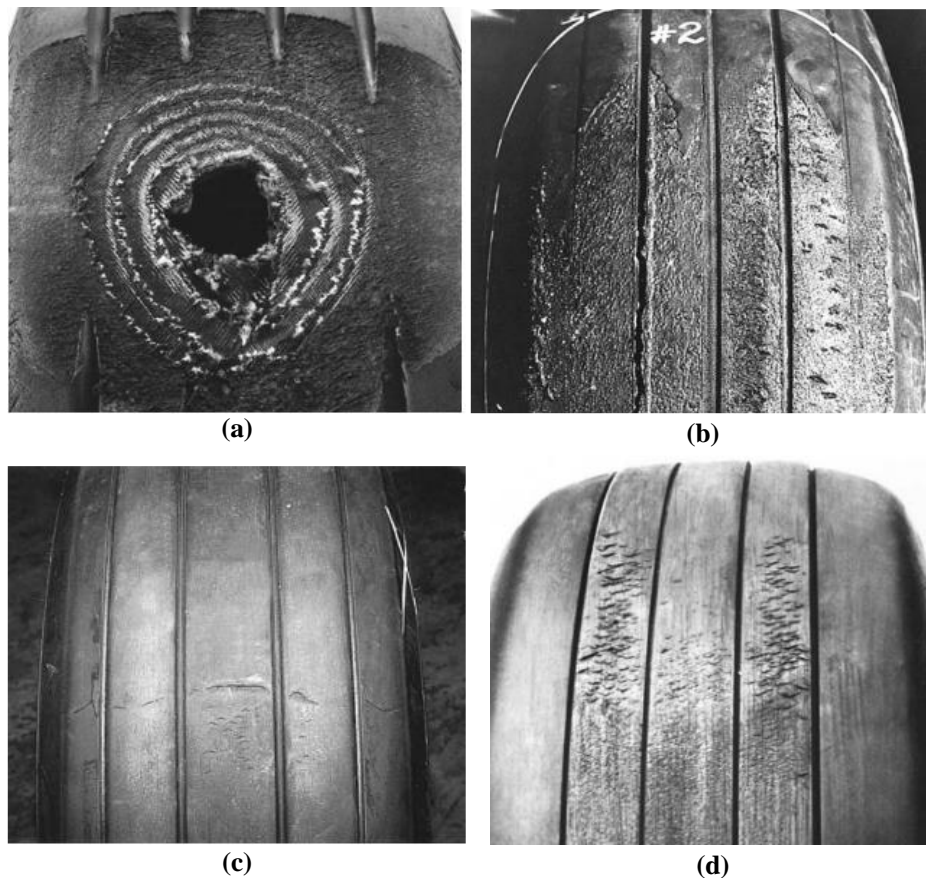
Tyre tread wear patterns: (a) Skid, (b) Tread Rubber Reversion, (c) Open tread splice and (d) Chevron cutting [46].
